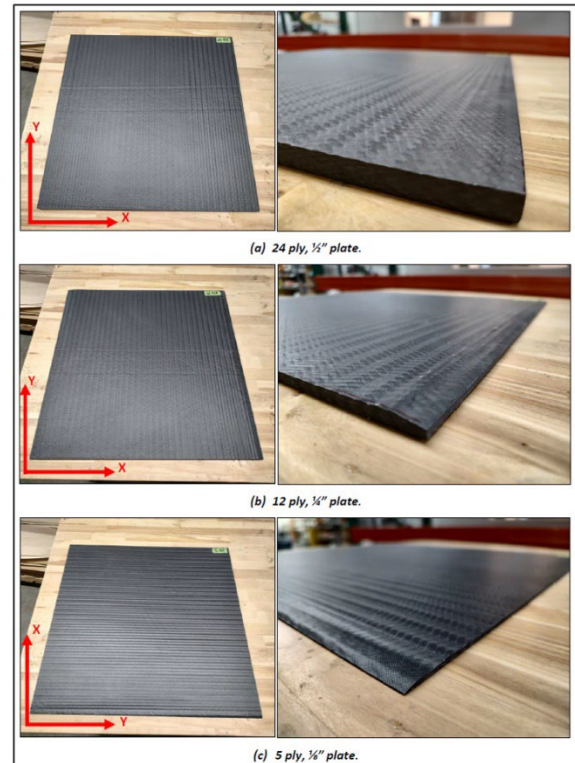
Images of triaxial carbon fiber / epoxy panels manufactured using vacuum assisted resin transfer molding process.
